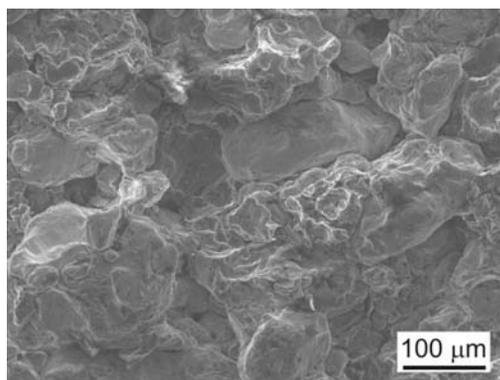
Fracture surface of specimens after pressing at 600 MPa
